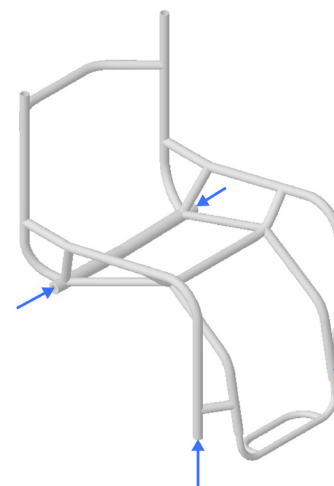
Cross-Over frame with arrows indicating the places where the frame would be fixated during the welding process.
